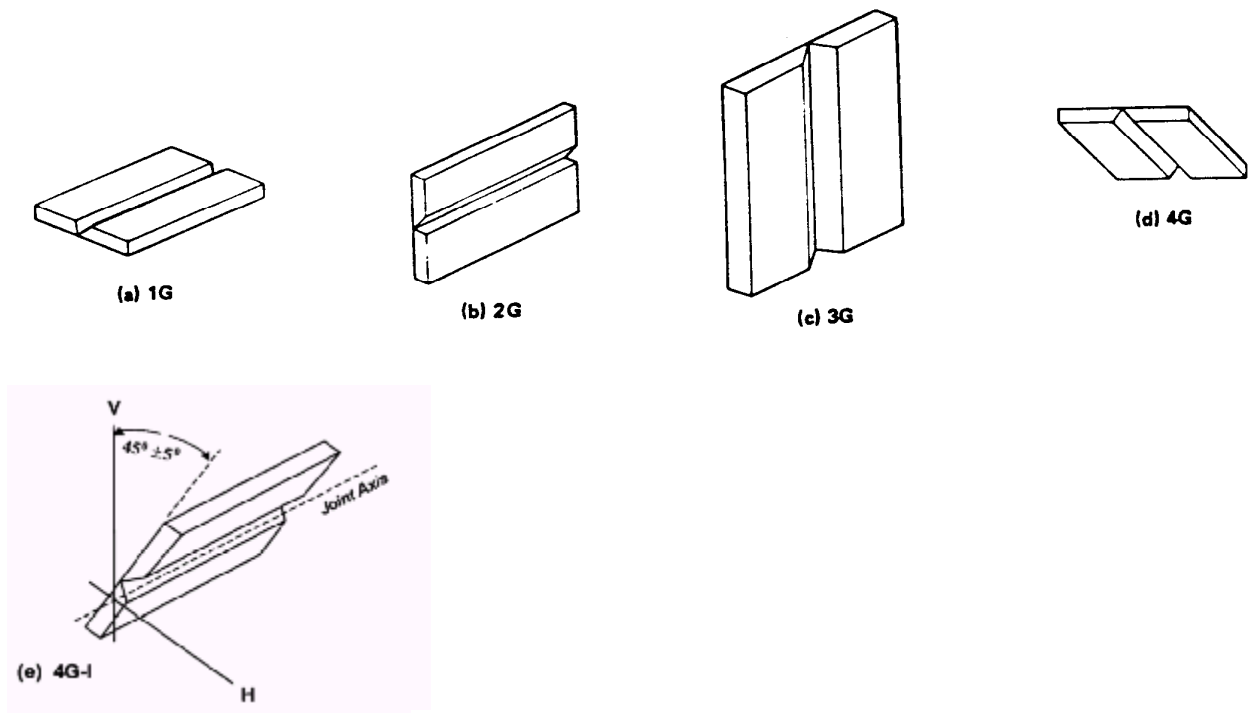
Groove Welds in Plate, Test Positions
